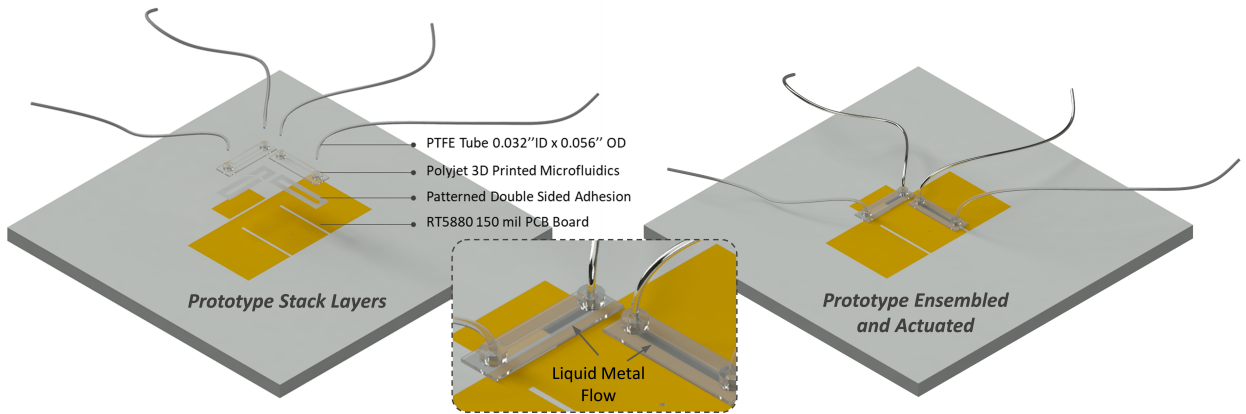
The multilayer prototype assembly. The prototyped liquid metal reconfigurable extended E-shaped patch antenna is assembled by attaching a Polyjet 3D printed microfluidics to the patch antenna on 250 mil RT5880 PCB substrate via a patterned double-sided adhesive layer. PTFE tubes are then inserted and sealed with UV and thermal epoxy.
